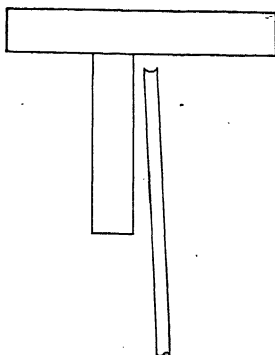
Overhead fillet weld showing position of electrode.
